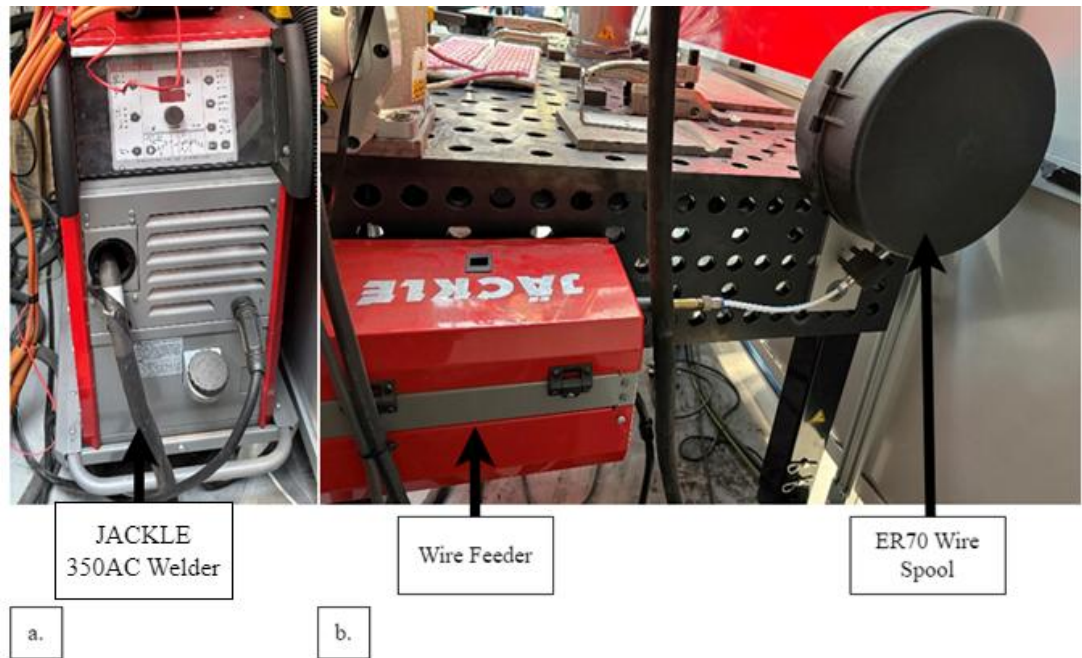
Welding equipment assembly: (a) JACKLE 350AC welder; (b) Wire feeder unit (left) and ER70S 1.2 mm filler wire spool (right), positioned adjacent to the robotic cell.
